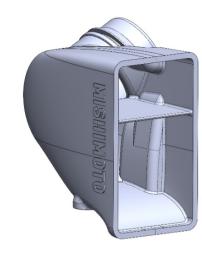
Mishimoto intercooler hot side endtank internal air diverter
